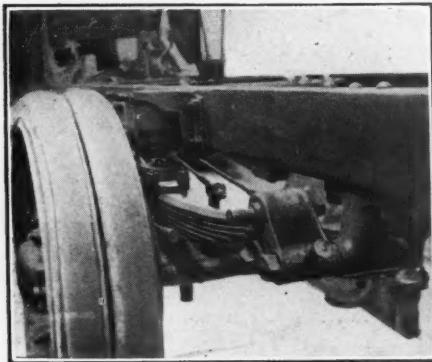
This Photograph Shows the Volute Subsidiary Springs on the Three-Ton Wells Chassis
